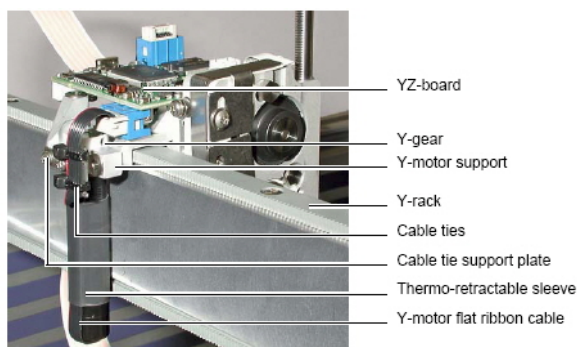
Y-motor Assembly with Spring-loaded Y-motor Support
